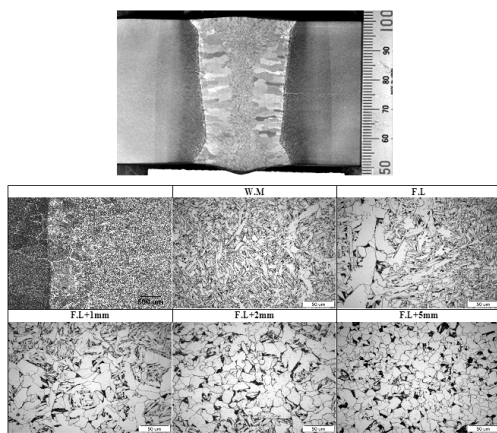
Macrostructure and microstructure of single EG welded joint (welding heat input = 342kJ/cm)
